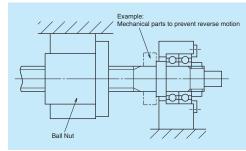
Nut and ball screw are required to be separated when installing in this structure.
